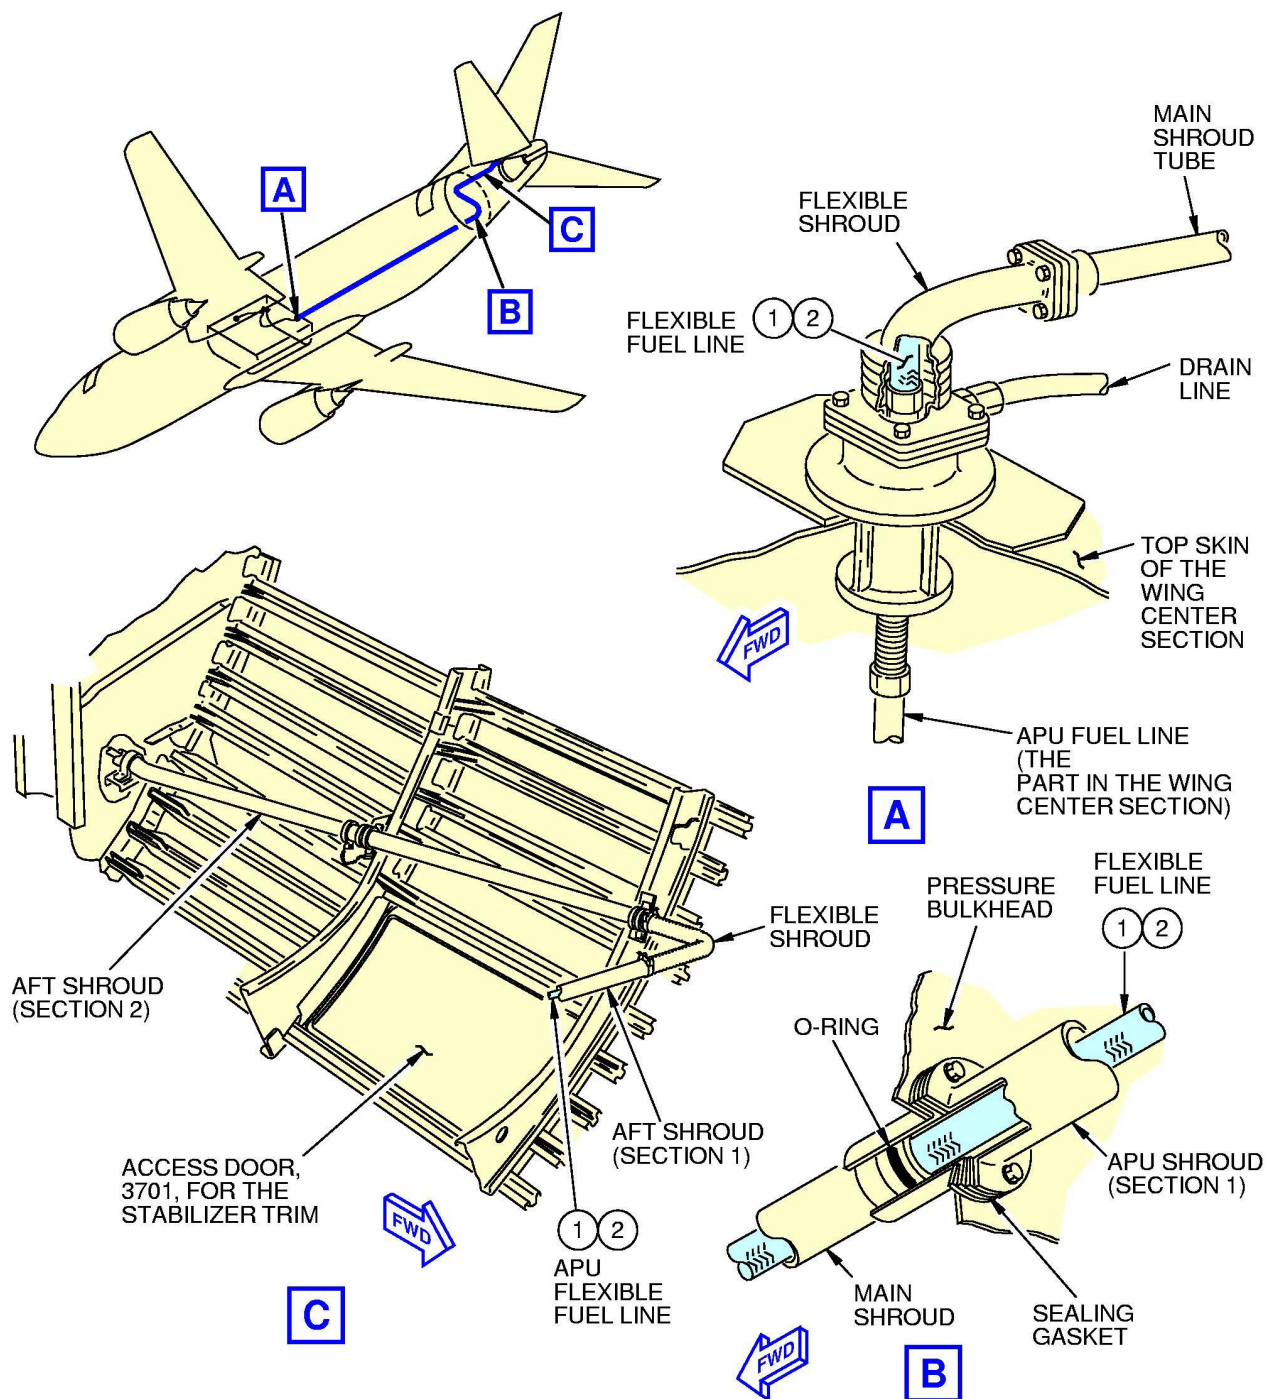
APU HOSE ASSEMBLY REPLACEMENT
